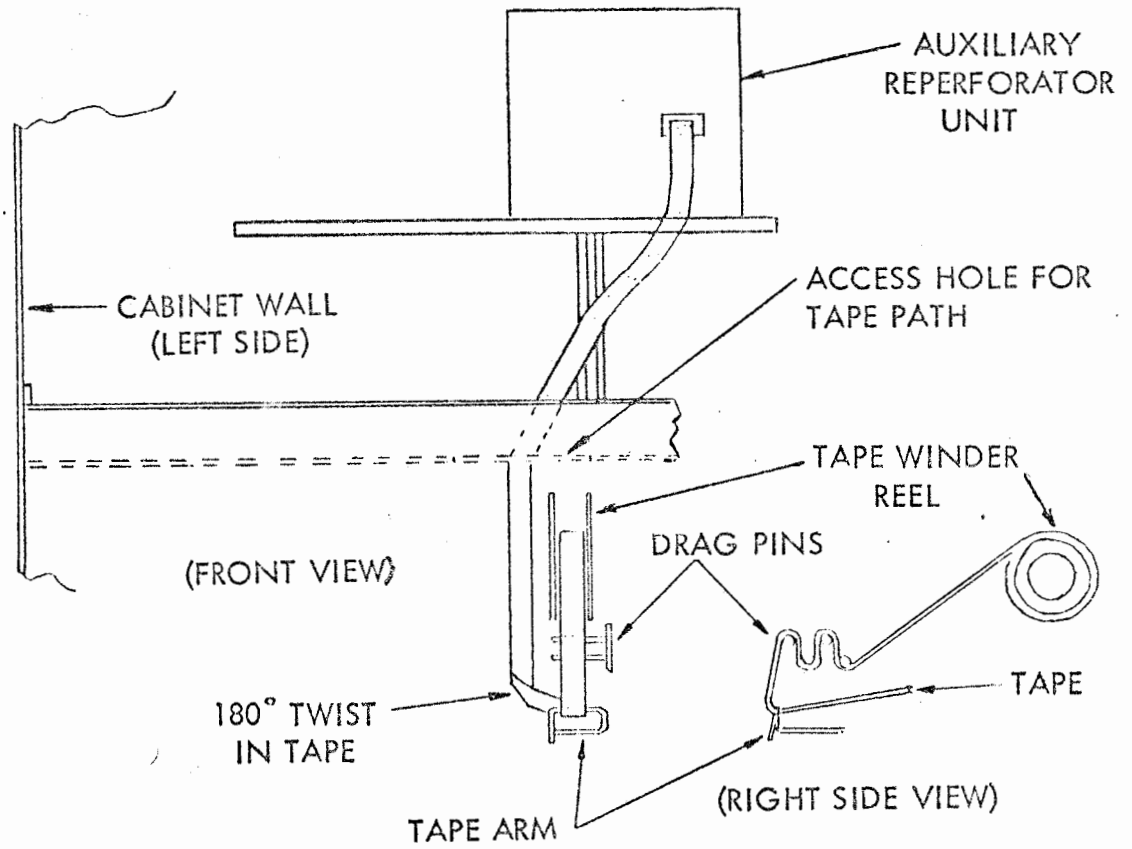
TAPE PATH FROM AUXILIARY REPERFORATOR UNIT TO TAPE WINDER REEL
